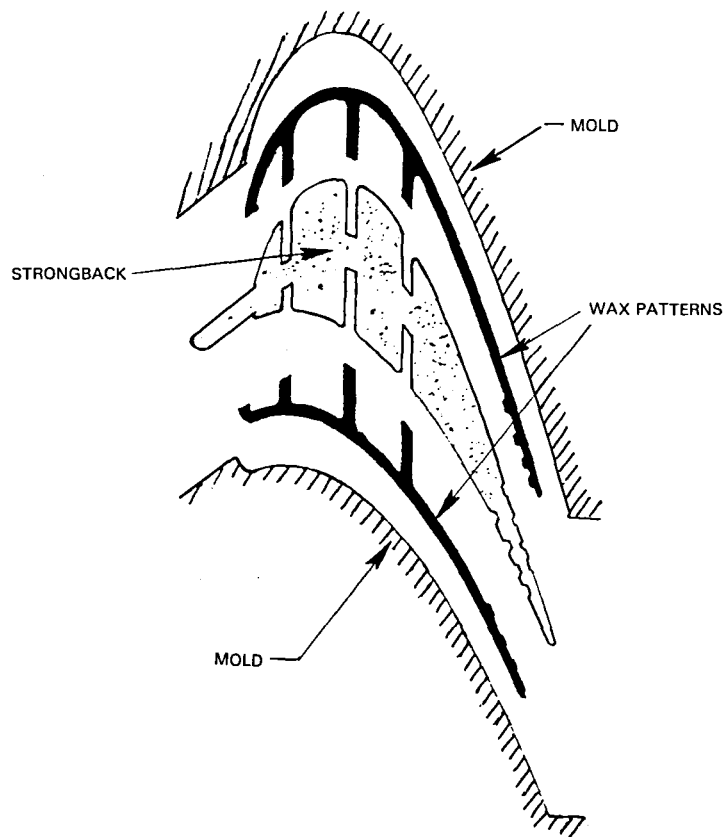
Typical Wax Mold Assembly for a Two-Piece Casting (Exploded View)
